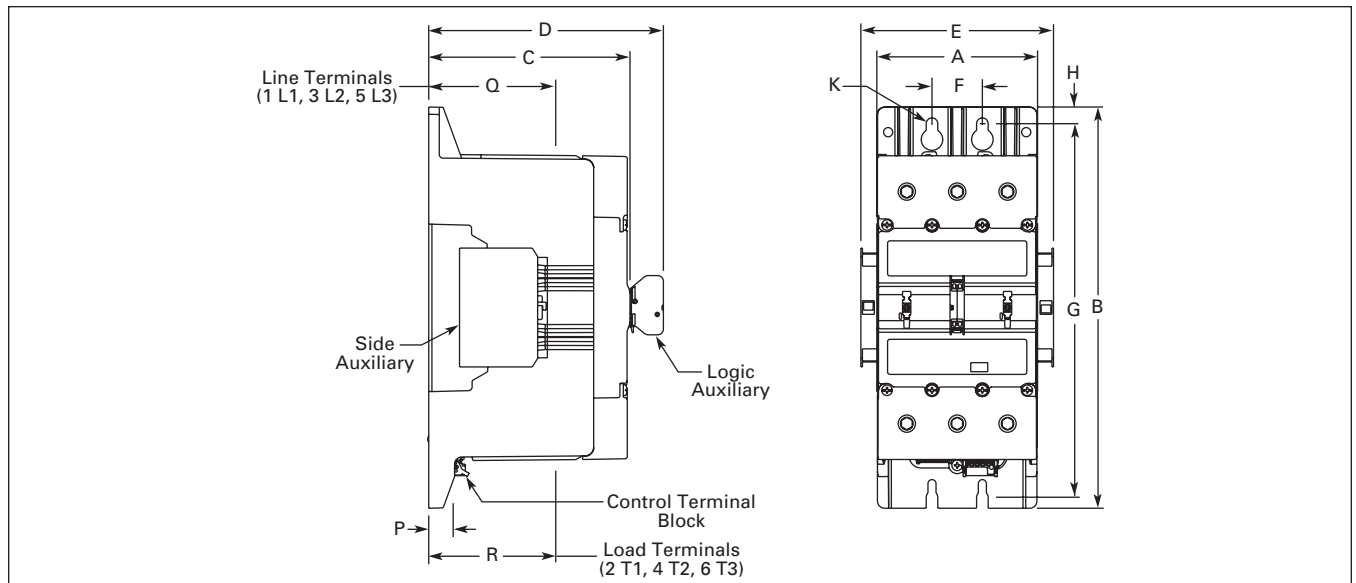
Approximate Dimensions — Inches (mm)
